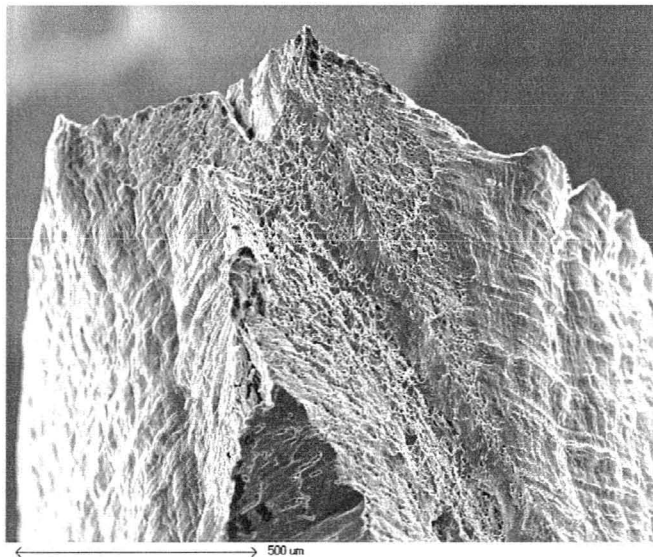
Fracture Surface, 4.11at%Mg sample, 298K test, 85x magnification
